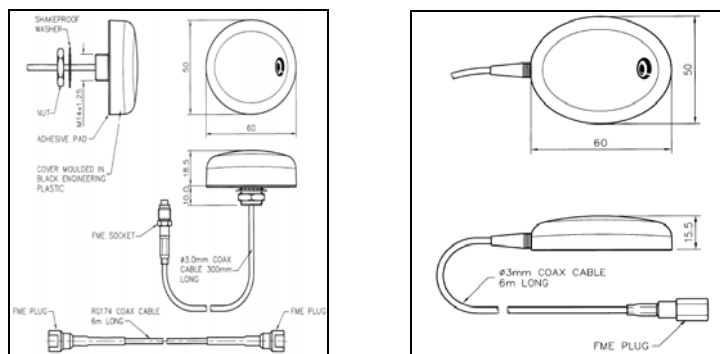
Mechanical Drawing GPS Panel and Magnetic Mount
